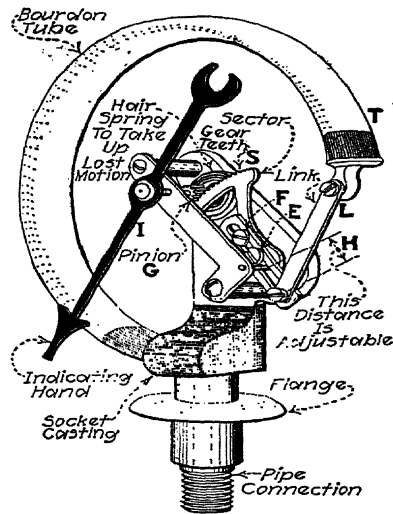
The mechanism of a Bourdon-tube pressure gage.
